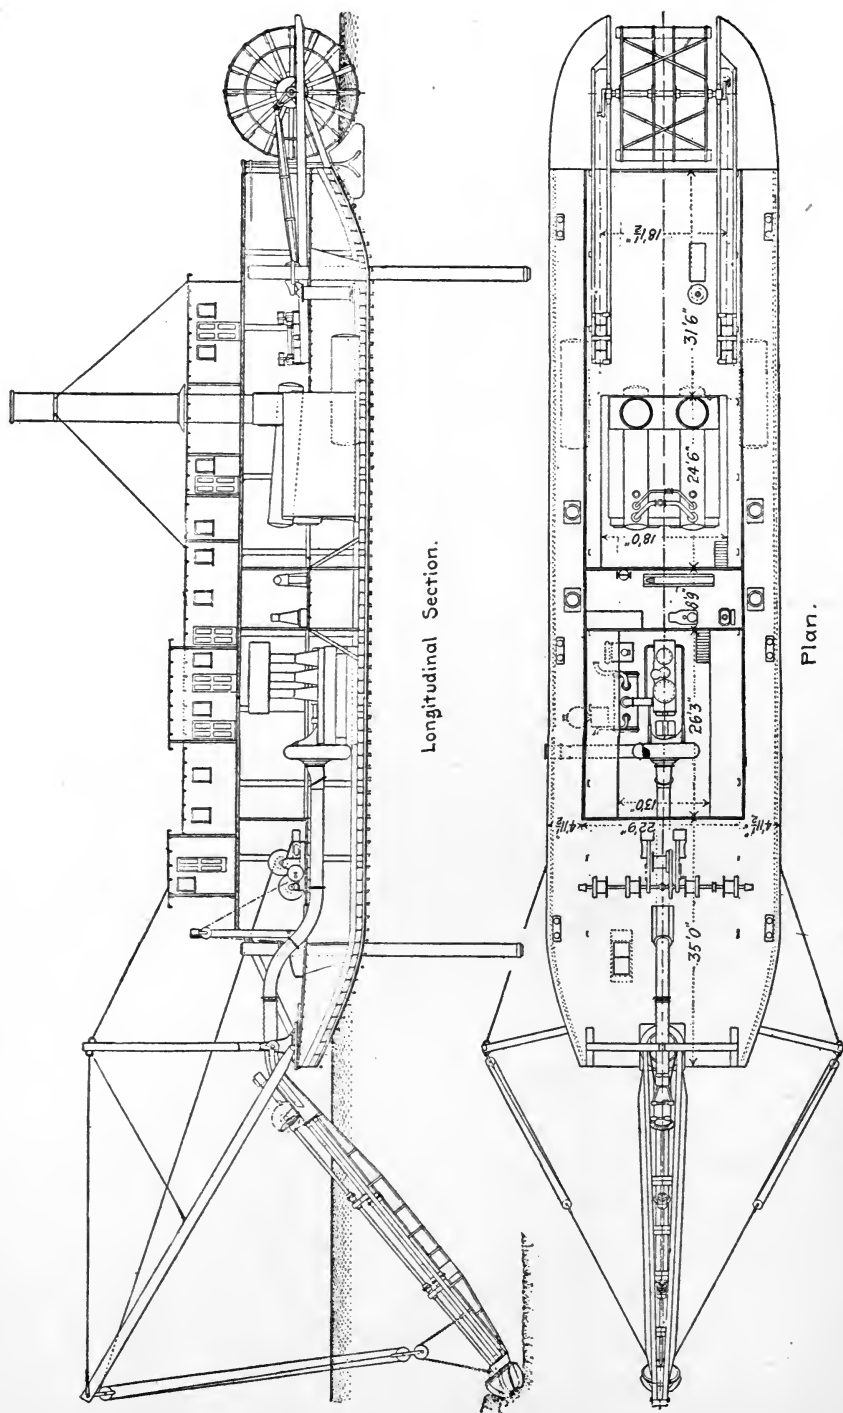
Deck Plan and Longitudinal Section of the Dredge "King Edward VII."
